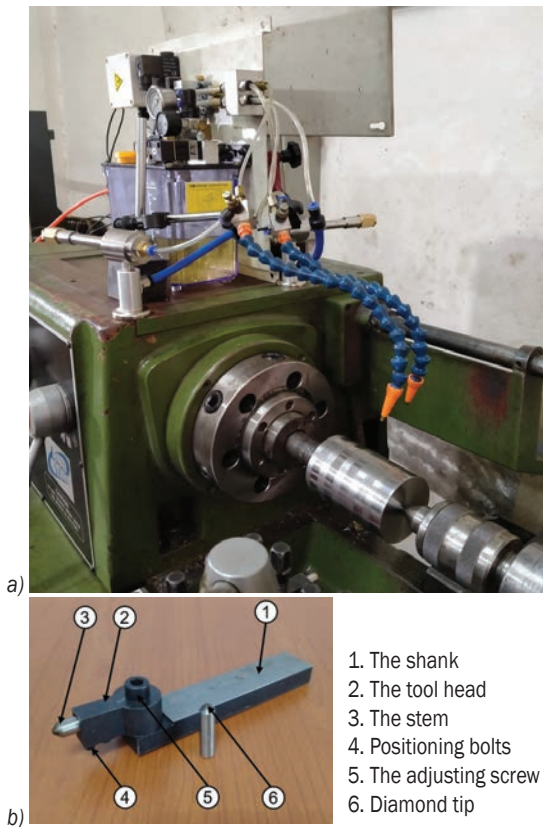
The experimental setting; a) burnishing experiment, and b) diamond burnishing tool
